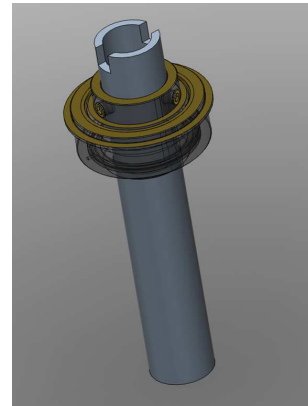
Model of the extended-ring bearing and support tube for mounting the LED array support frame.
